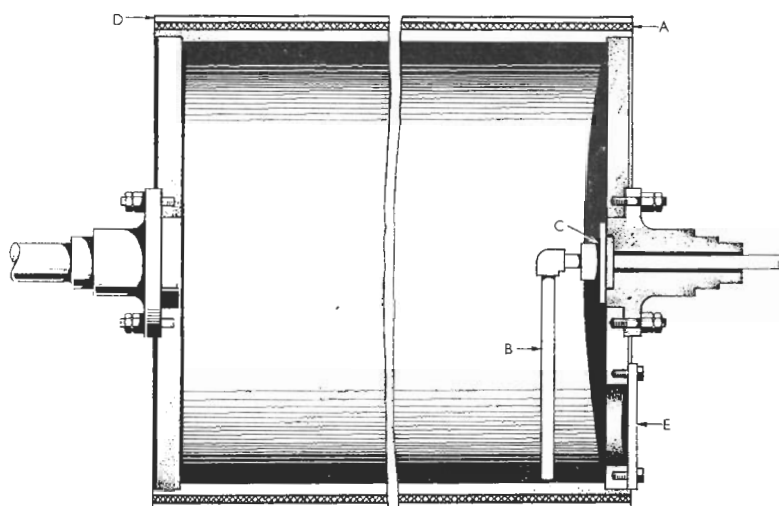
Ventilated roller for 56 × 25-in. return feed flatwork ironing machine.
